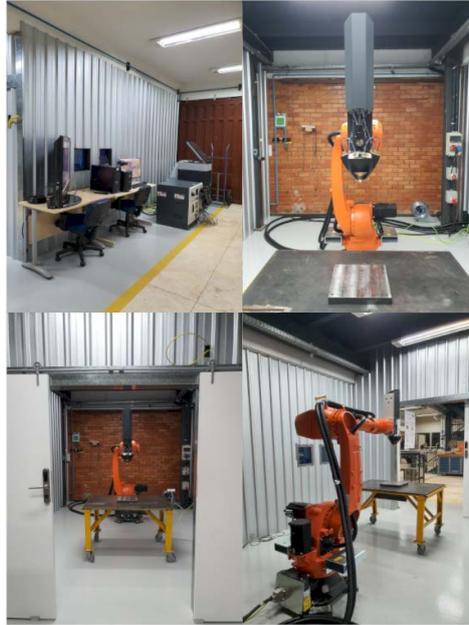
LMD-Wire Robotic Additive Manufacturing Cell in assembly: Kuka KR70 R2100 and Meltio Engine Robots.
